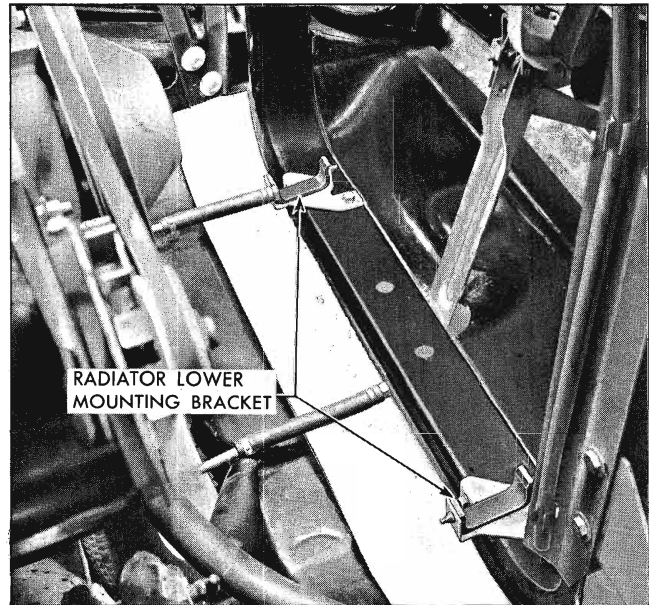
Location of Radiator Assembly Lower Mounting Brackets
